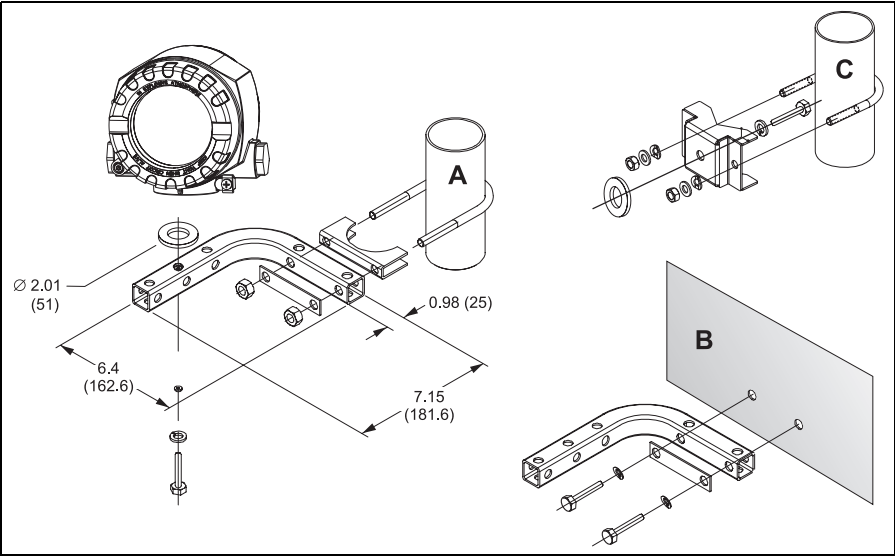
Installation of the field transmitter using the mounting kit, see chapter 'Accessories' (dimensions in inches; mm)
